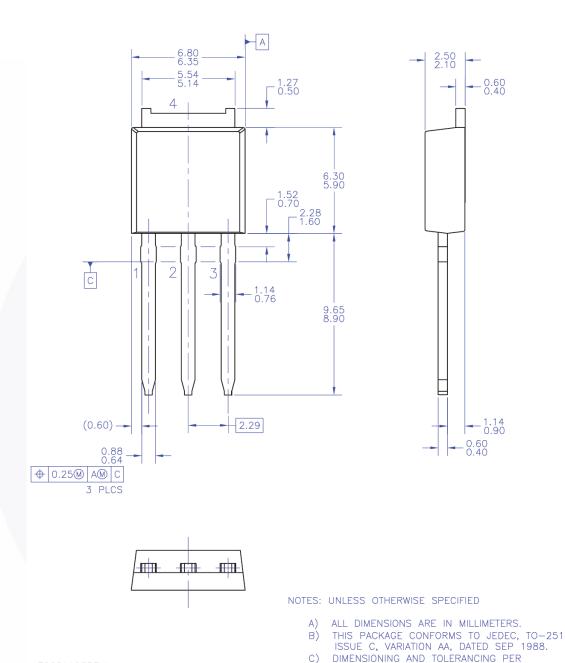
TO251 (I-PAK), Molded, 3-Lead
